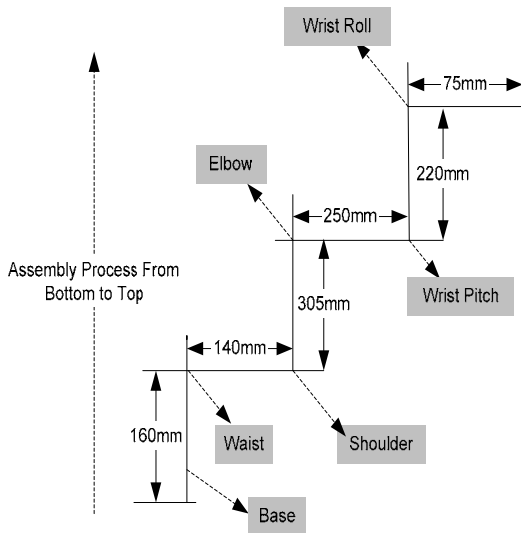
Mitsubishi RV-2AJ Robot Assembly Process
